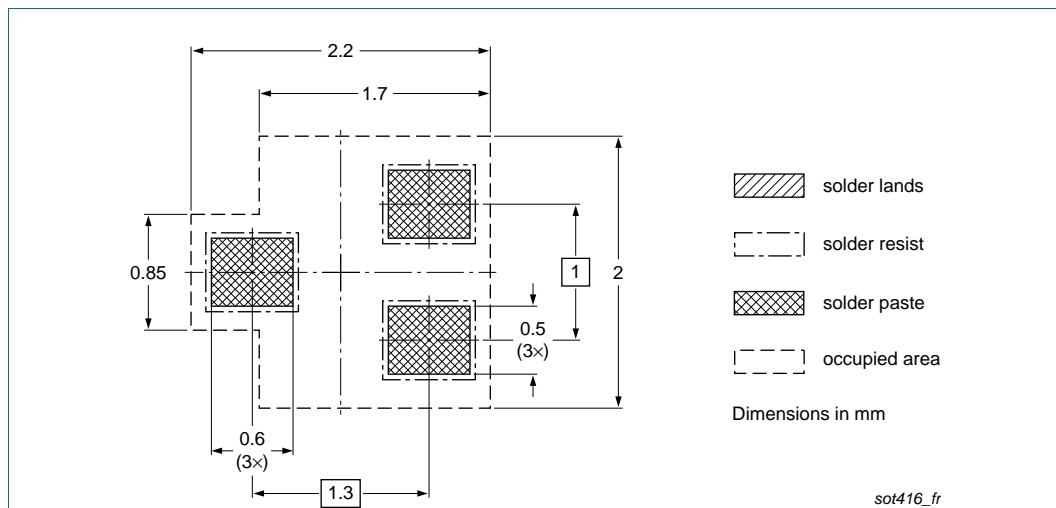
Reflow soldering footprint SOT416 (SC-75)
